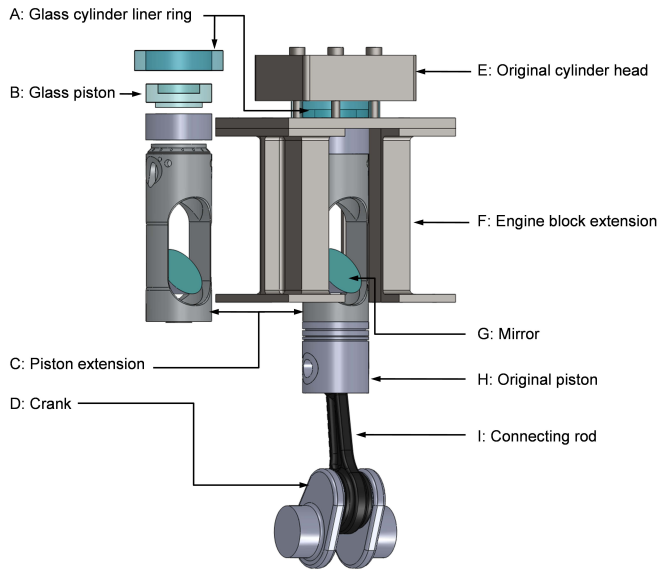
Schematic of Bowditch-type optical engine with details of the piston elongation assembly. Reproduced from [80].
